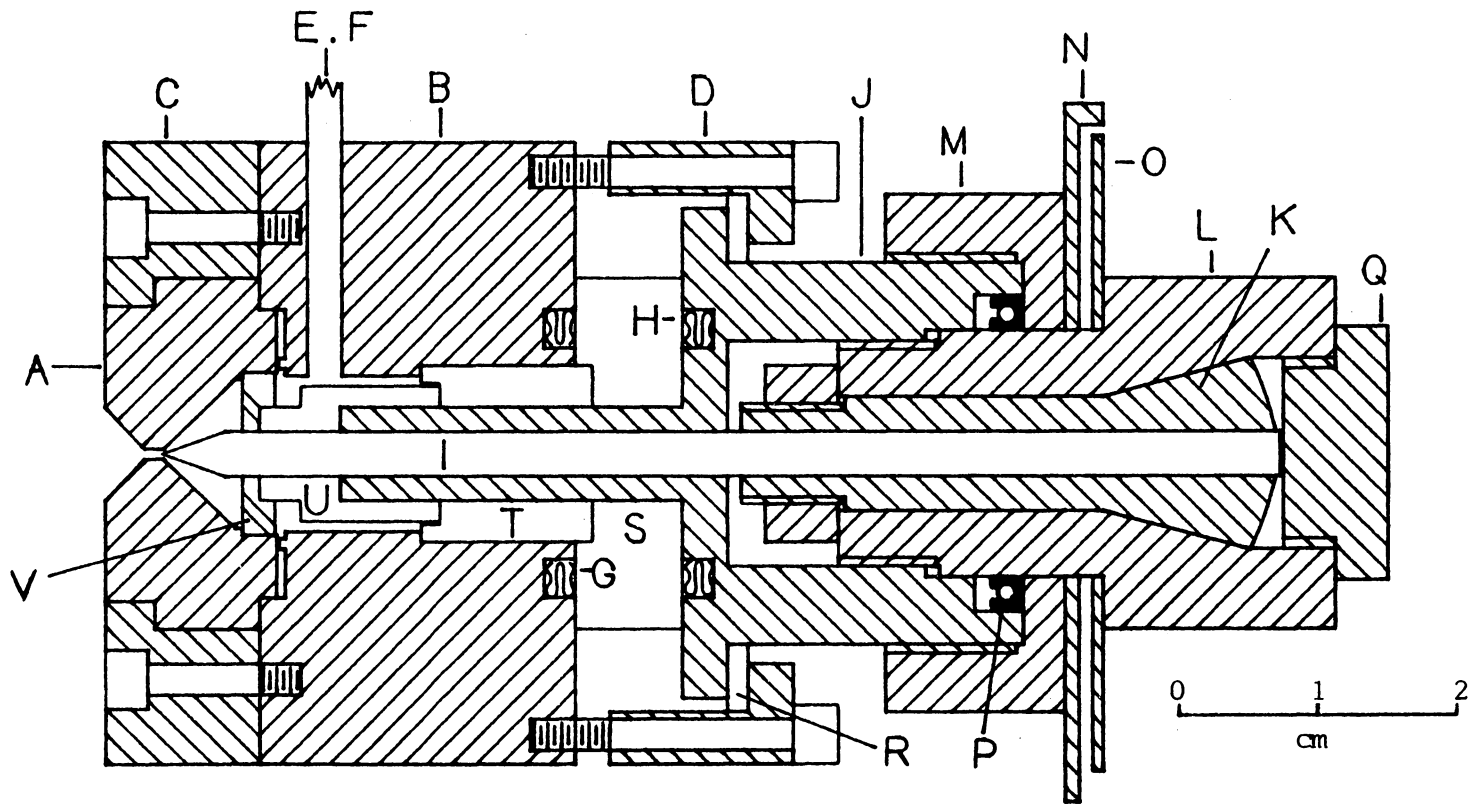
Adjustable Gap Plasma Torch A, anode; B, body; C, anode holder; D, pressure ring; E, gas inlet; F, pressure tap; G,H, E-ring seals; I, cathode; J, cathode alignment piece; K, collet; L, cathode adjustment knob; M, gland cap; N, mounting bracket; O, angle indicator; P, dynamic seal; Q, end cap; R,S, insulators; T, alignment piece; U, insulator; V, flow swirler
